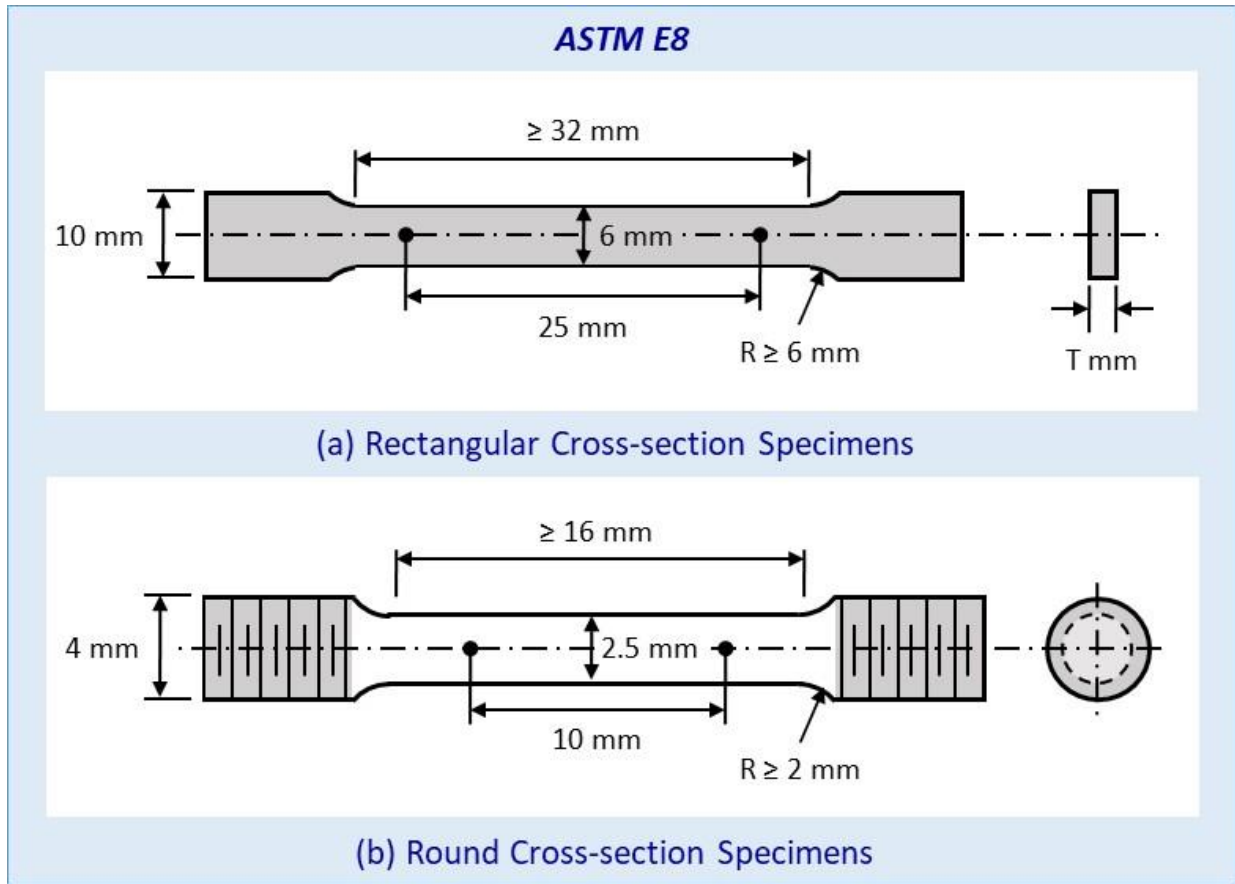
Standard specimen configurations for E8 tension testing [ref. 26]: (a), specimens with rectangular cross-section; (b), specimens with round cross-section. Note that the subsize versions are more compatible with BMG gear dimensions.
